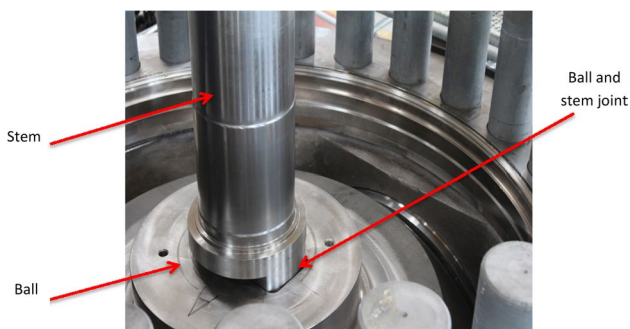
Ball, Stem and Ball and stem joint for a large size ball valve
